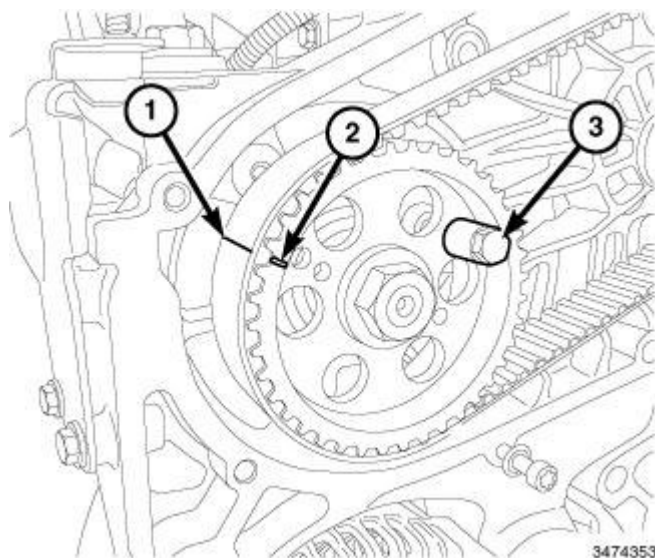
Aligning Timing Marks On Belt & Sprocket Using Removal/Refitting Tool
